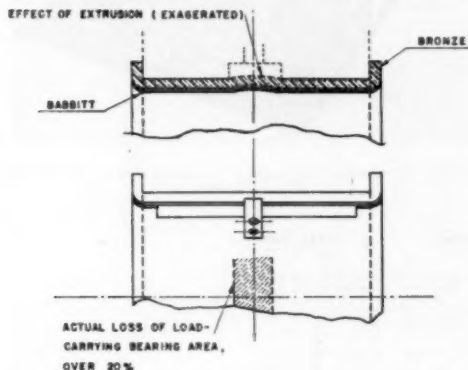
EXTRUSION OF DEFECTIVE BRONZE BEARING BACK INTO CONNECTING-ROD OIL GROOVE
